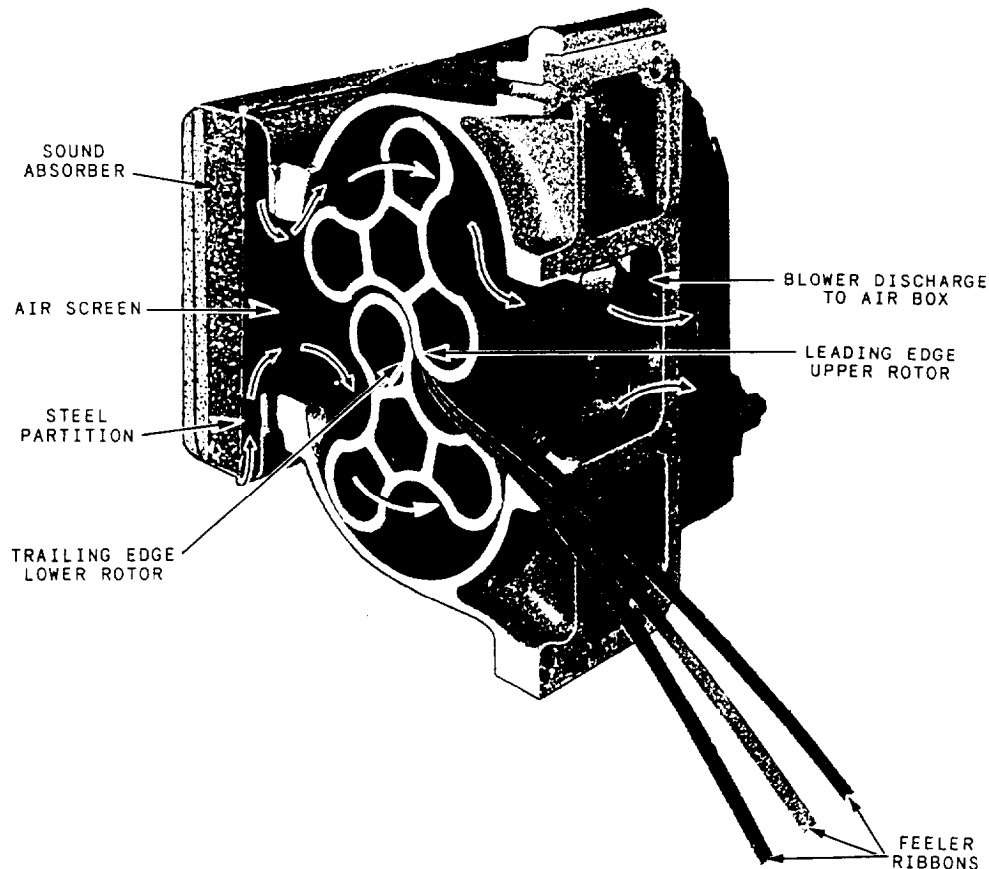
Checking clearances of positive-displacement blower lobes.
